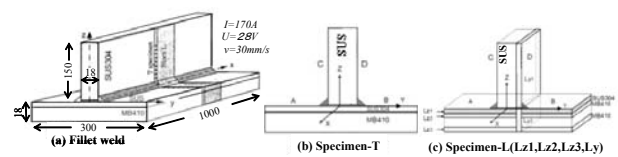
A fillet weld and specimens for measurement of welding residual stresses
